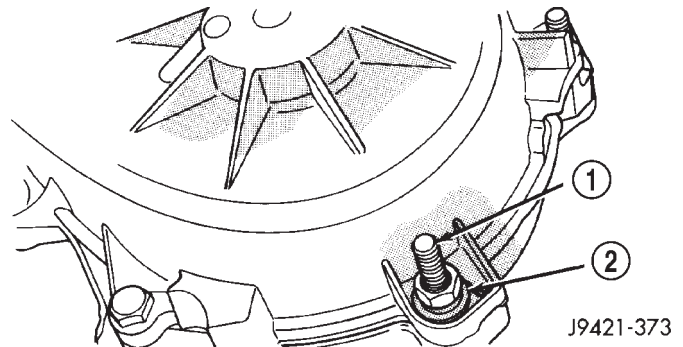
Washer Installation On Case Stud And Dowel Bolts
